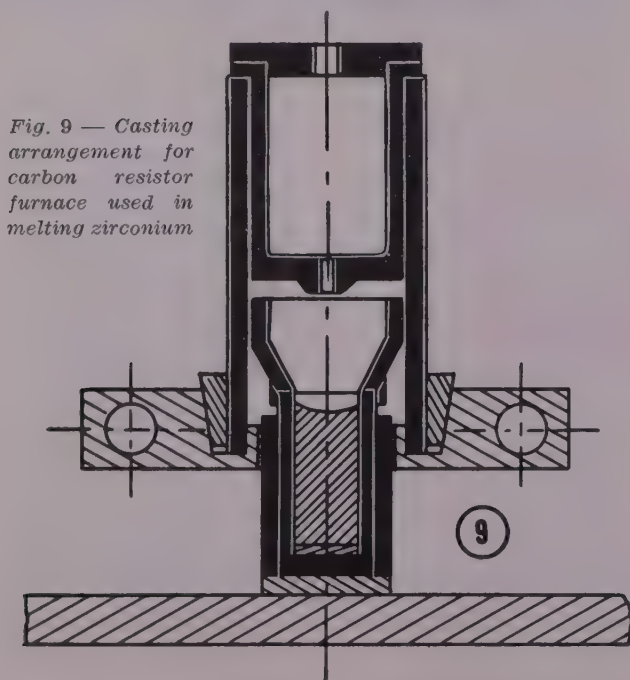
Casting arrangement for carbon resistor furnace used in melting zirconium
